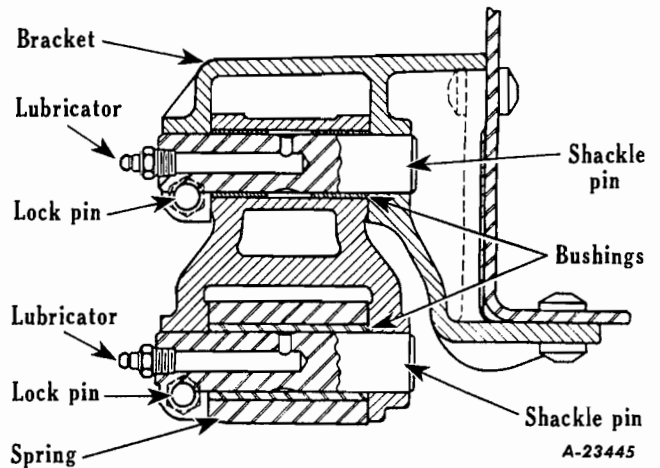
Rear Spring Rear Shackle For Models L-150, L-153.
